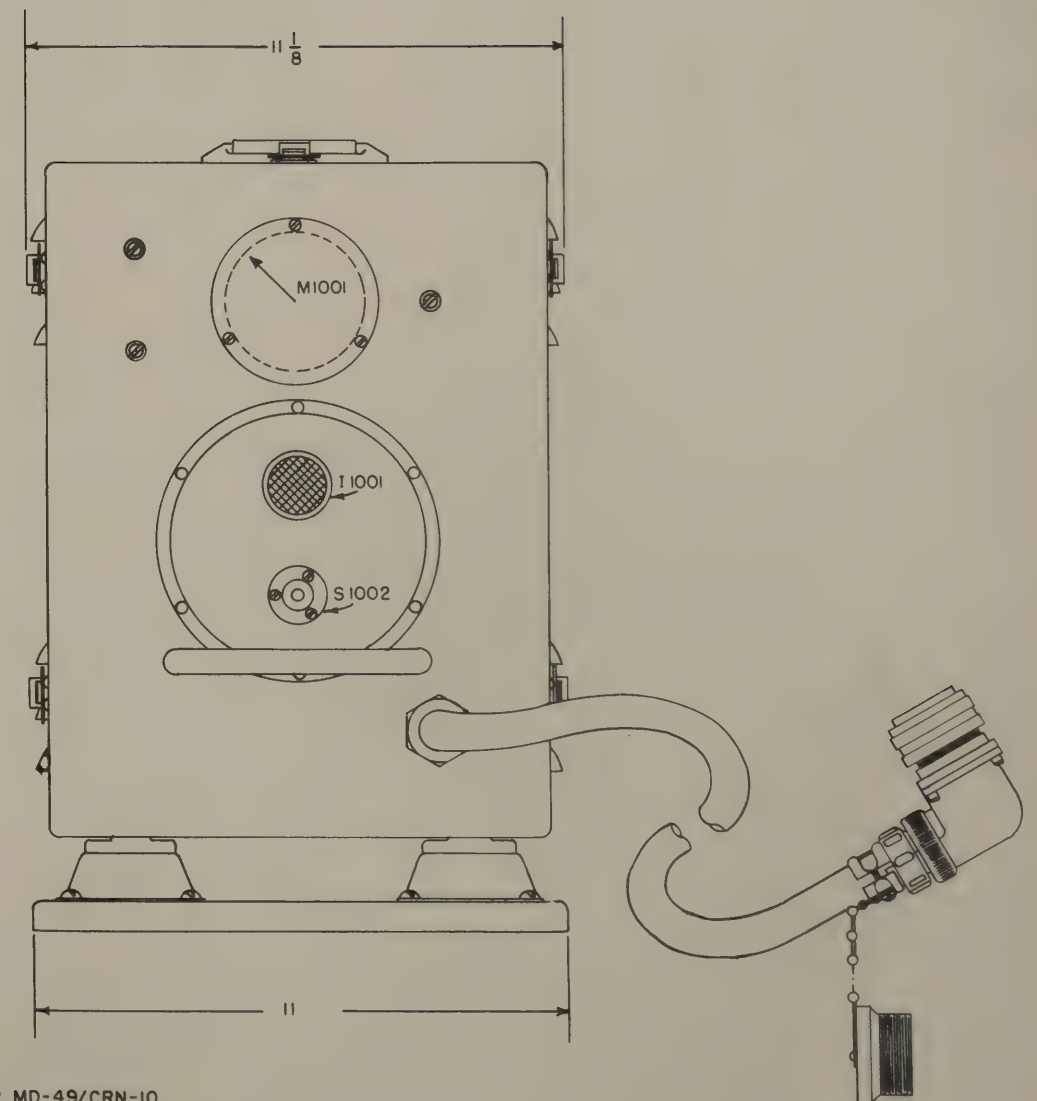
A. Modulator MD-49/CRN-10—Outline Dimensions
